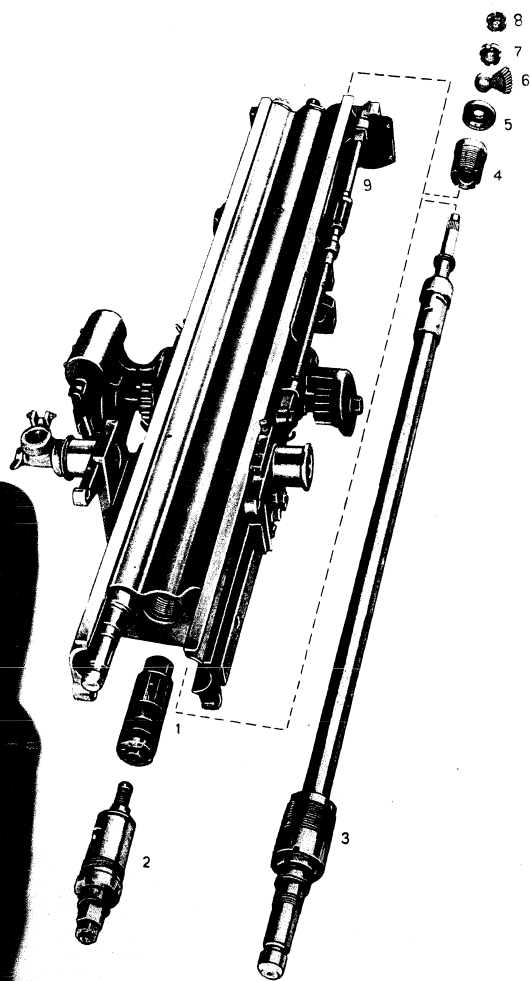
CRADLE WITH FLOATING PISTON, REGULATOR, PISTON ROD AND REAR RECOIL BRAKE STUFFING BOX
